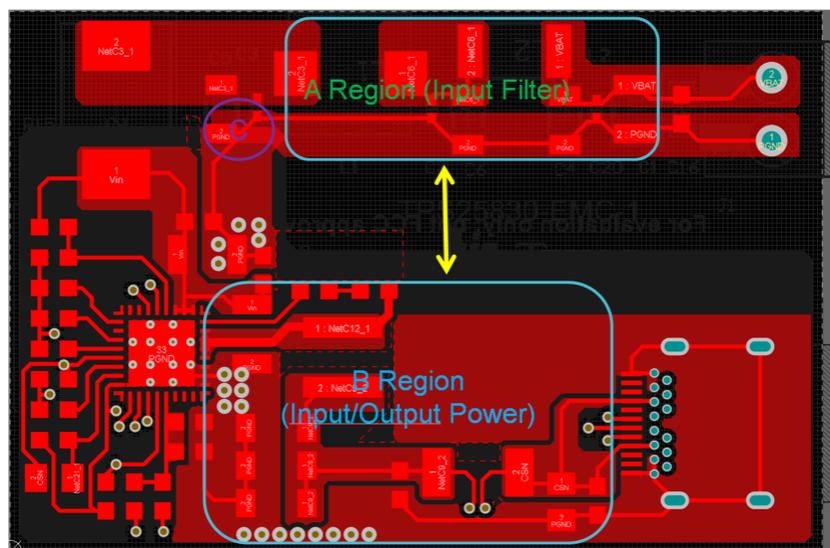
Single-Sided Device Placement, Multi-Layer PCB Layout
